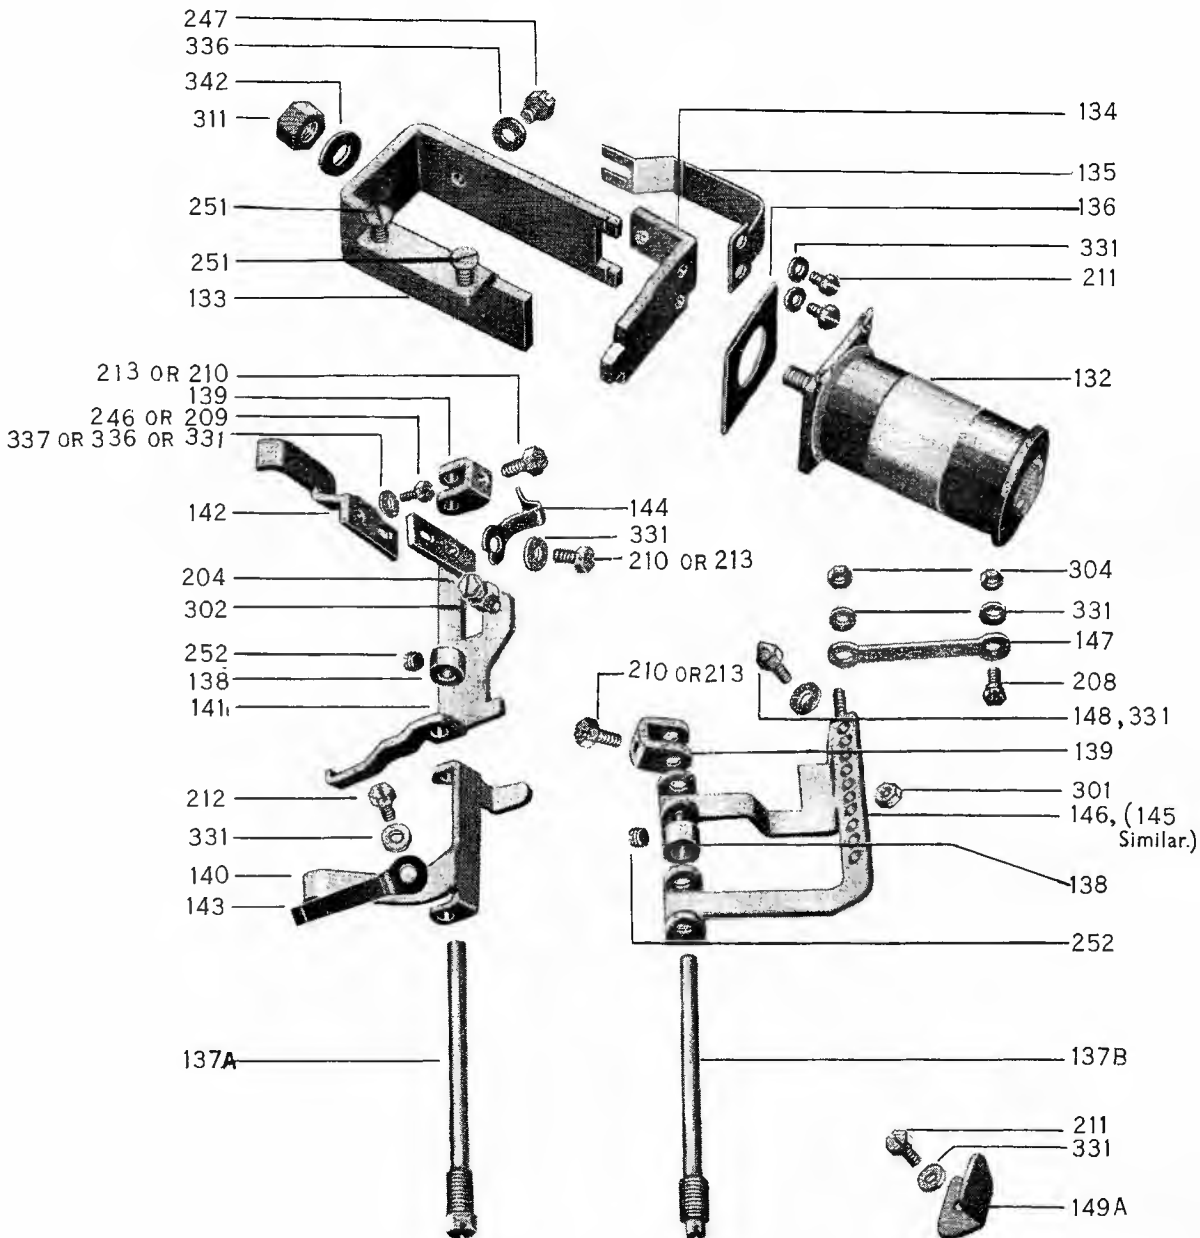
RELEASE MAGNET ASSEMBLY, DETENT AND NP ASSEMBLIES.
